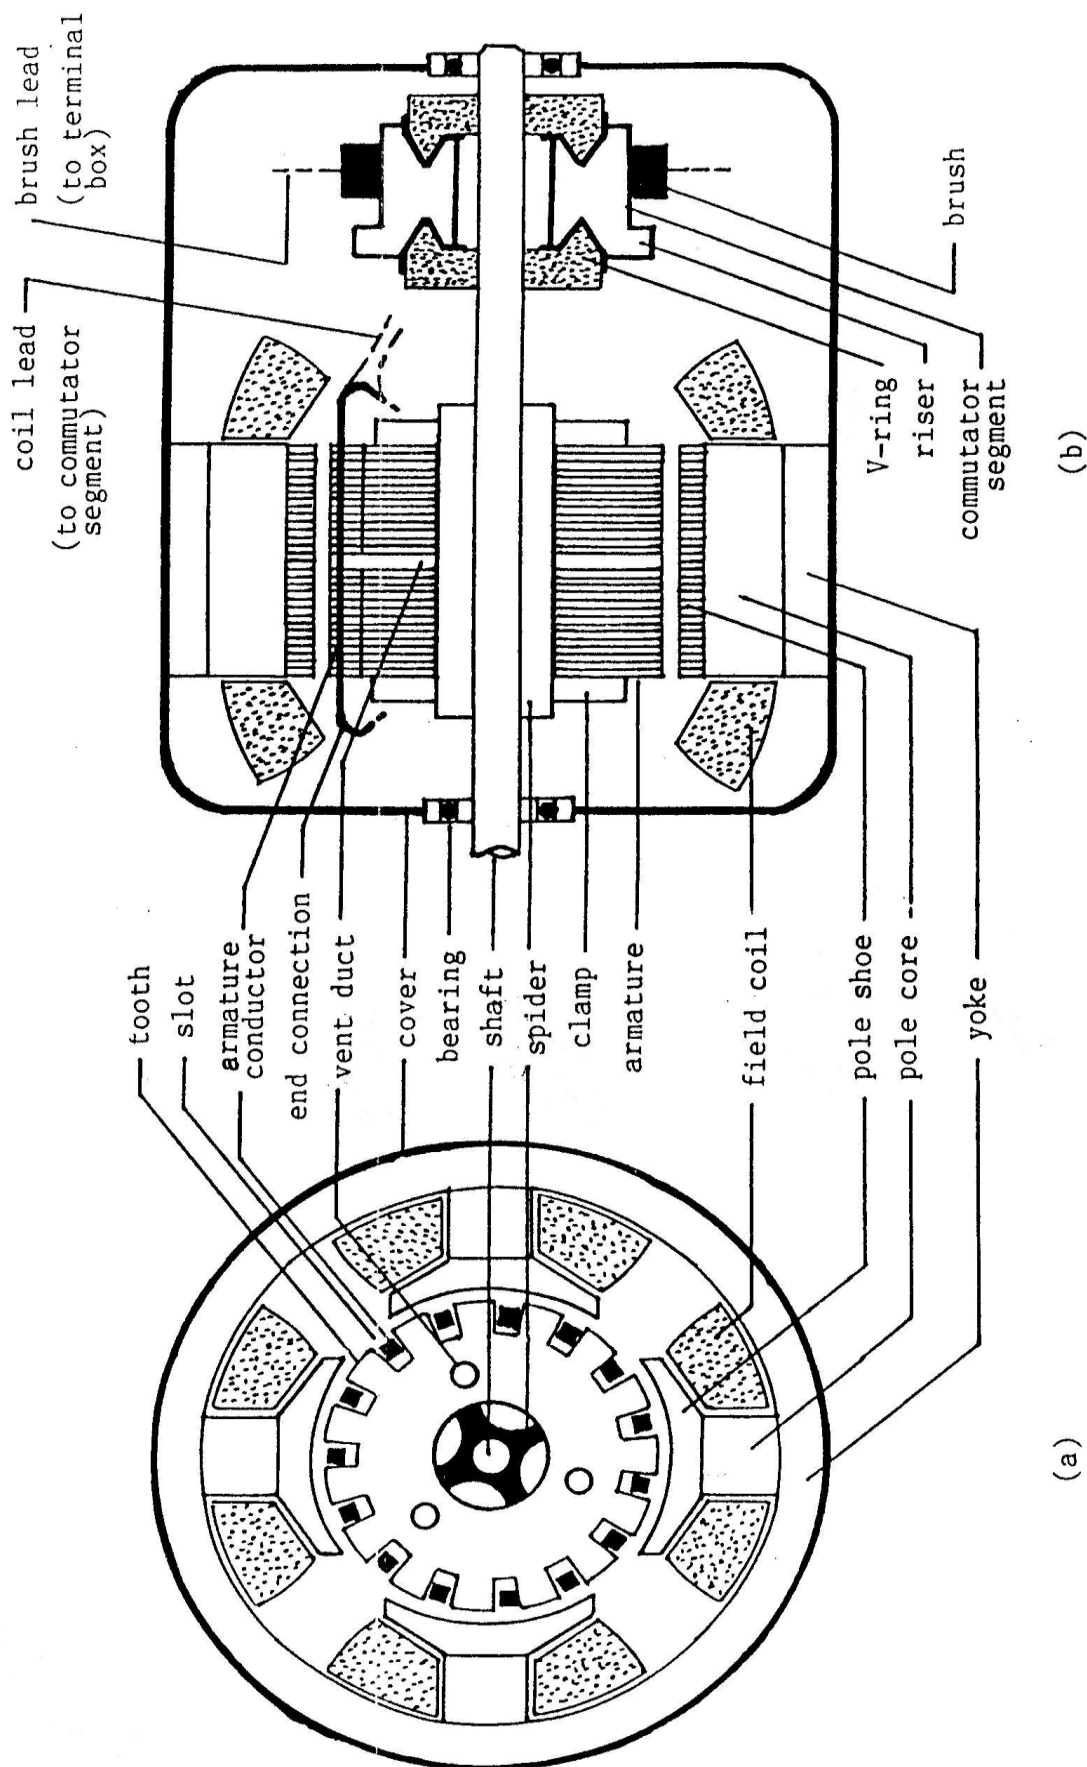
Typical dc machine : (a) cross section; (b) longitudinal section
